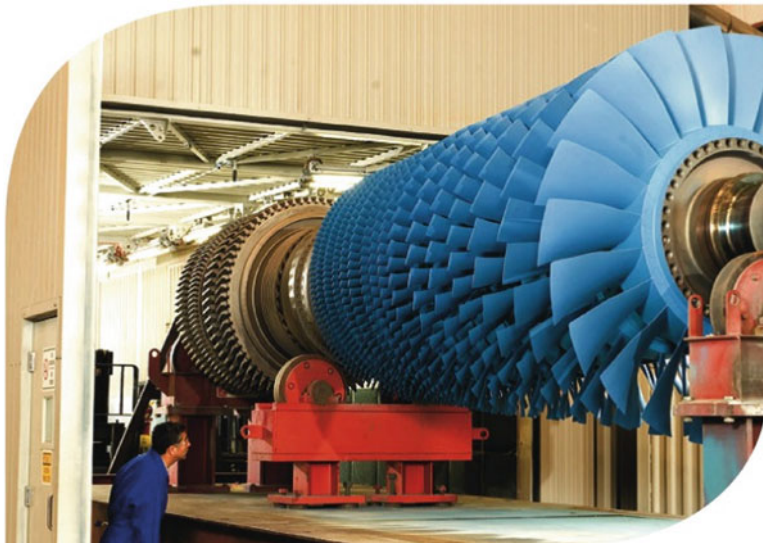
Coated blades of the compressor airfoil of an industrial gas turbine compressor (courtesy of Sulzer-Metco Turbo)
